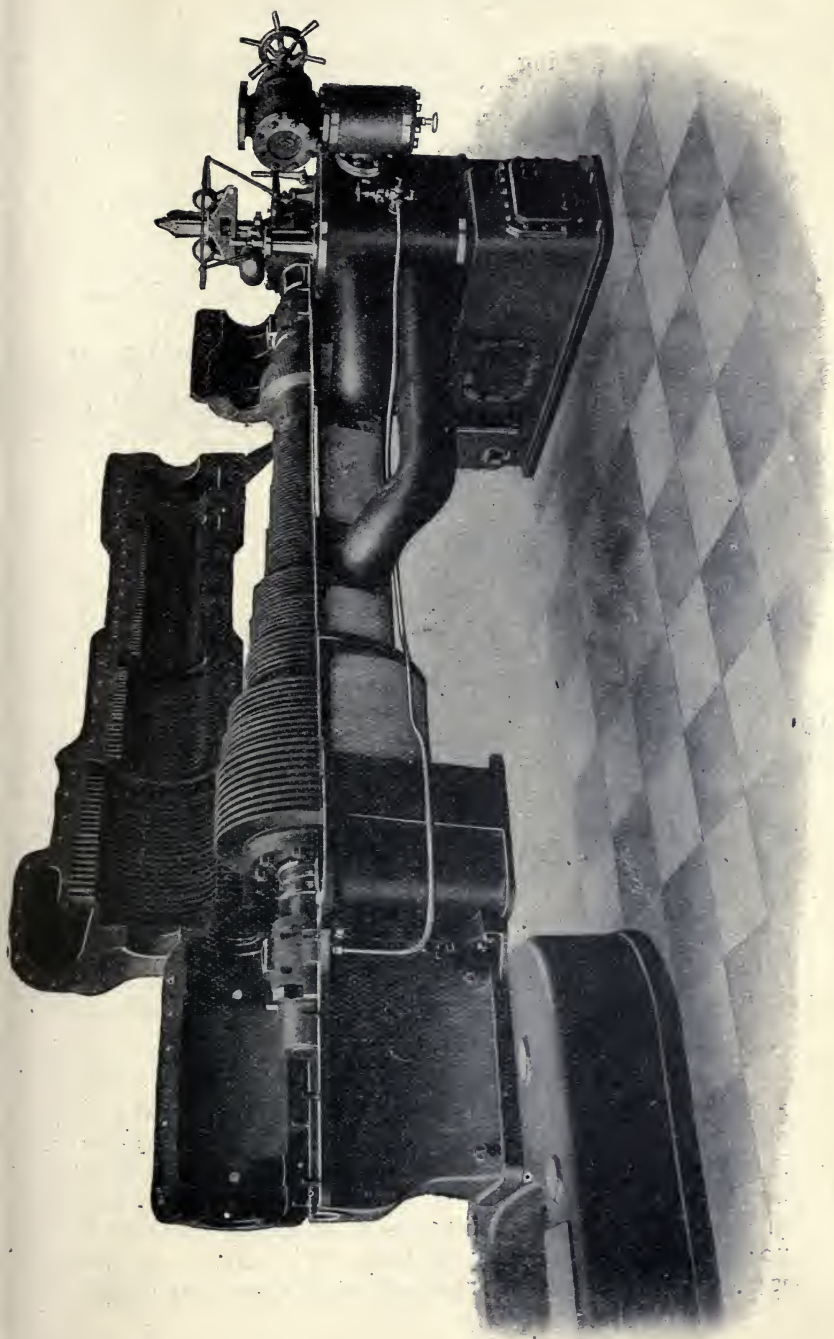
WILLANS & ROBINSON TURBINE OPENED UP FOR INSPECTION.
